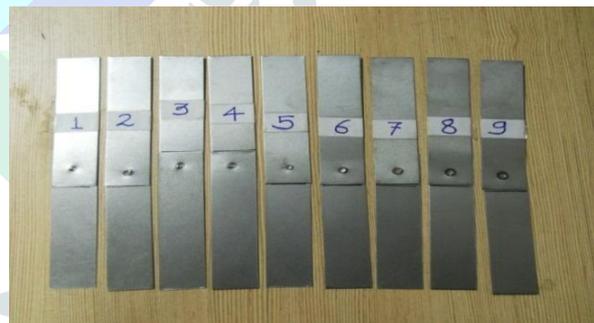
Test Sample when spot welding for Ultrasonic tests.
